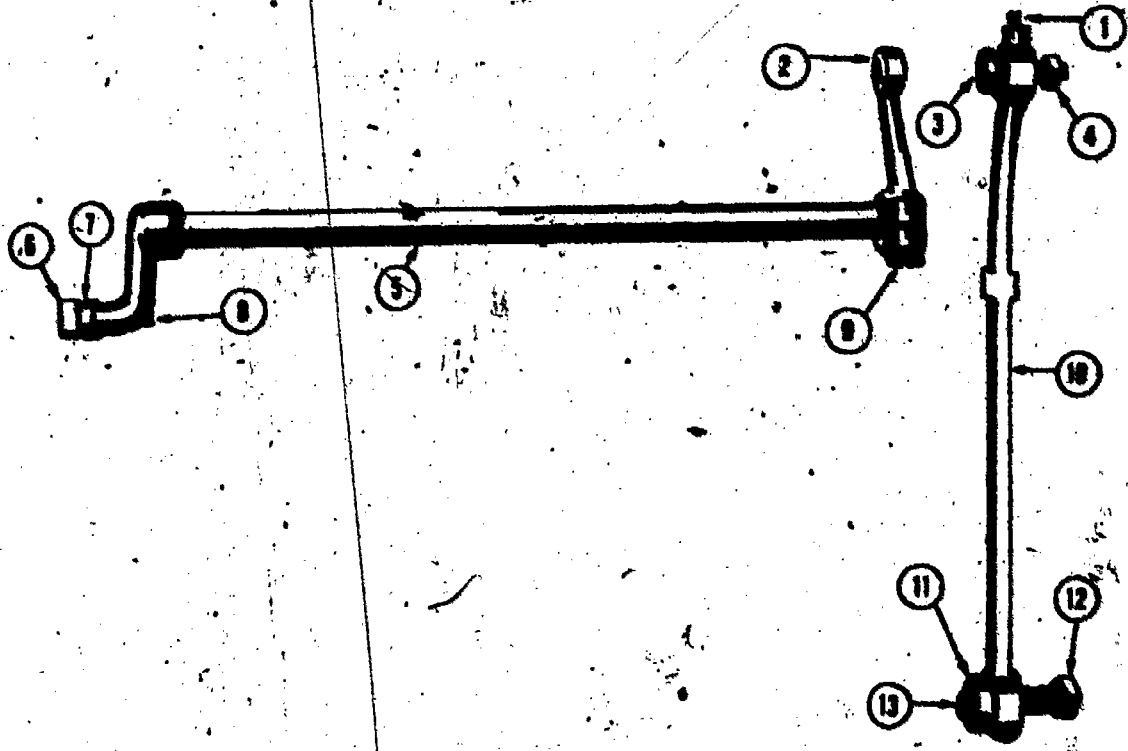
Needle Bar Rock Frame Rock Shaft Assembly
